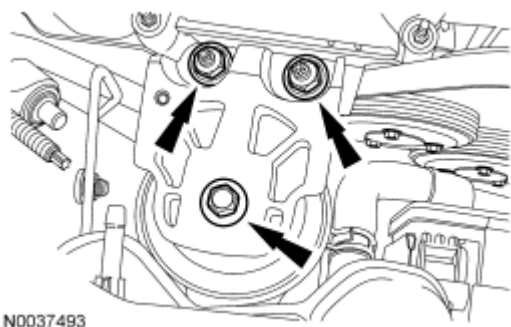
Locating Engine Mount Bracket Bolt And Nuts
